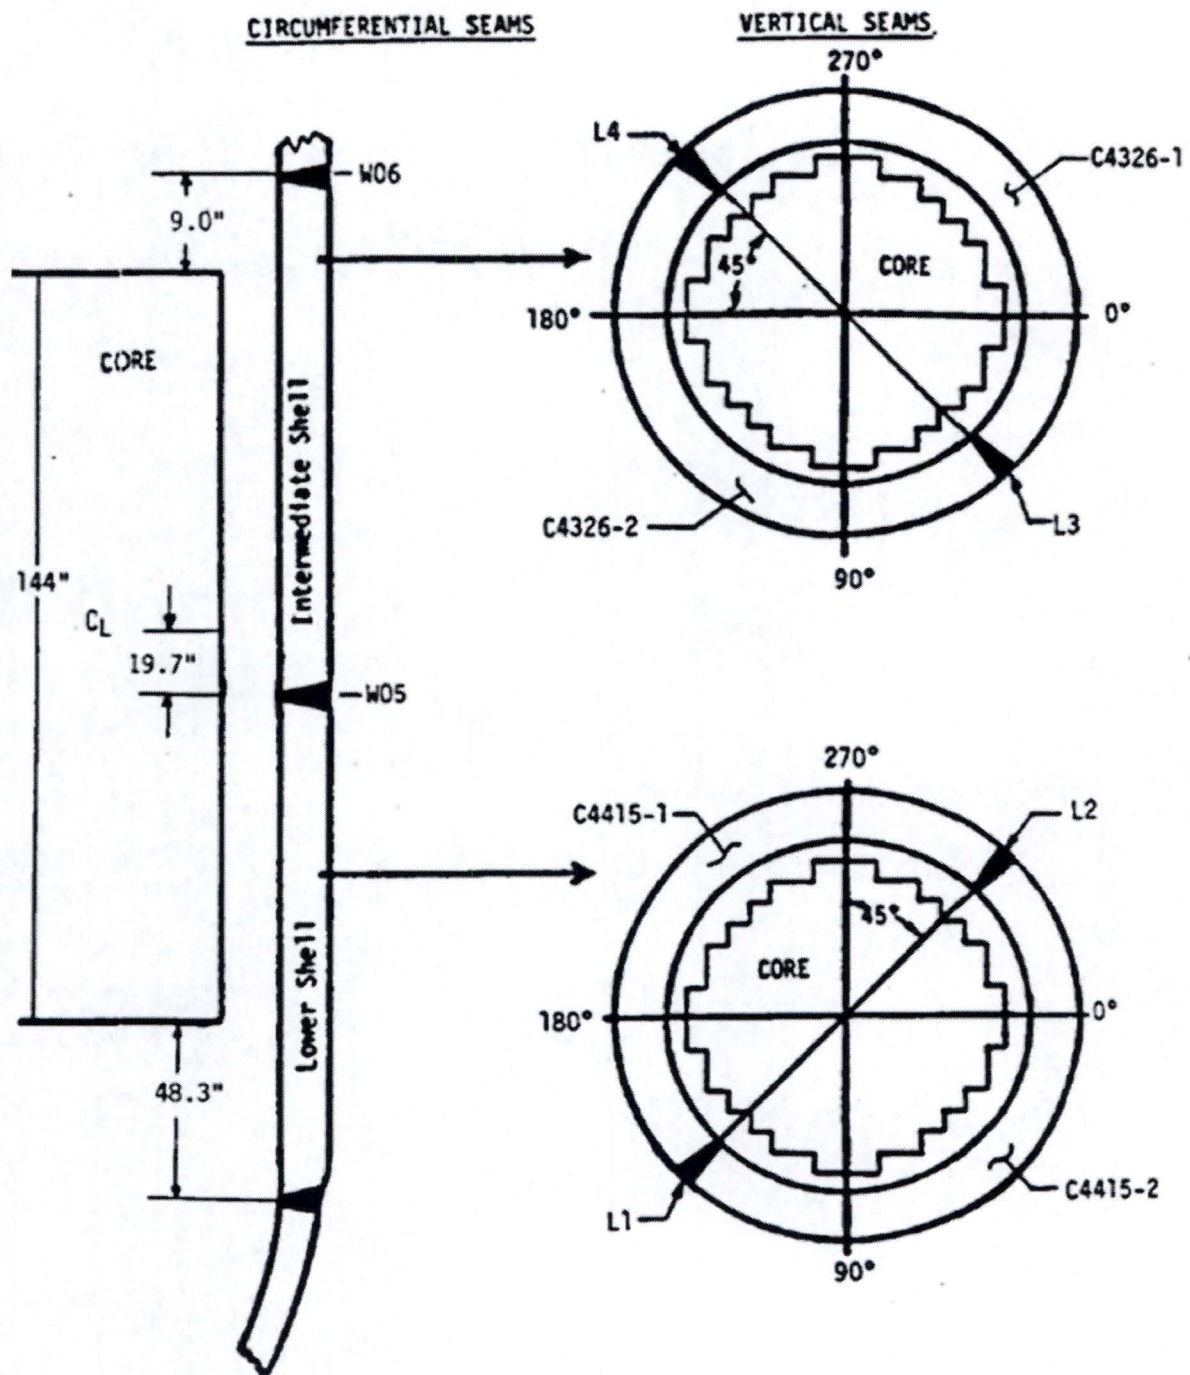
RPV Weld Identifications for Surry Unit 1
